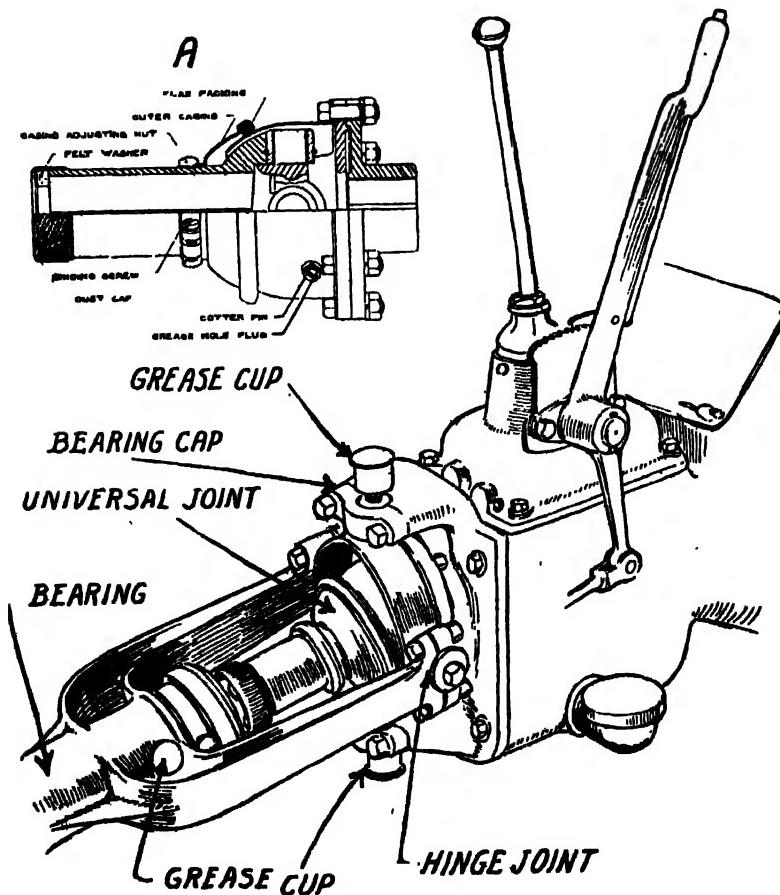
Method of Suspending Torque Tube on 1915 Buick Automobiles.
